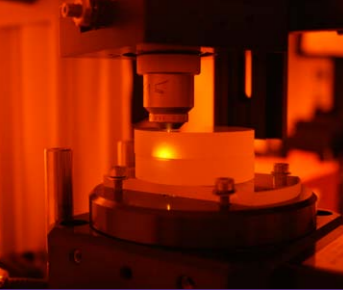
Local welding of glass with ultrashort laser pulses
